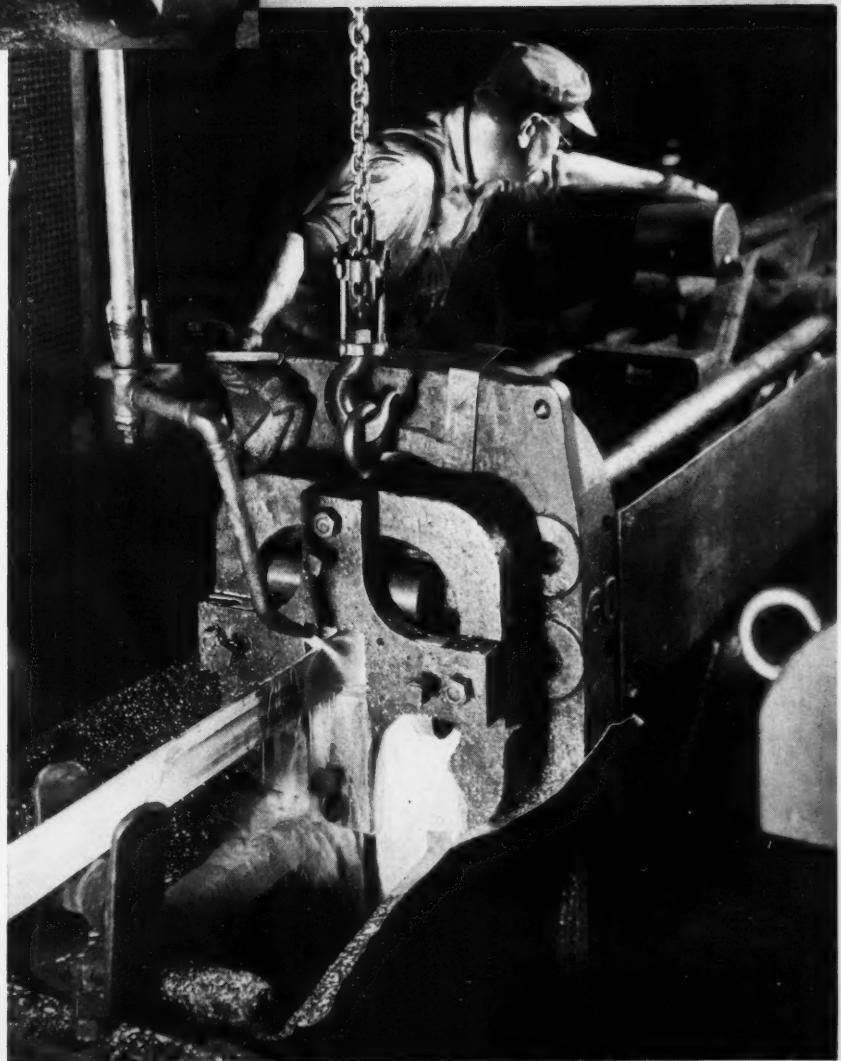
(Right). Cold-drawing stainless steel flats, Newburgh Works, American Steel & Wire Co., Cleveland.
